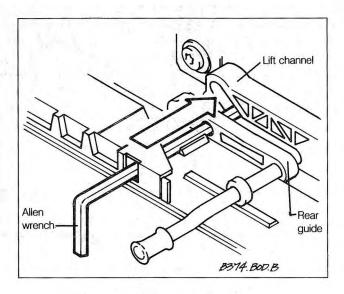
Allen wrench inserted through rear guides to lock guides in place. Lock both sides.
